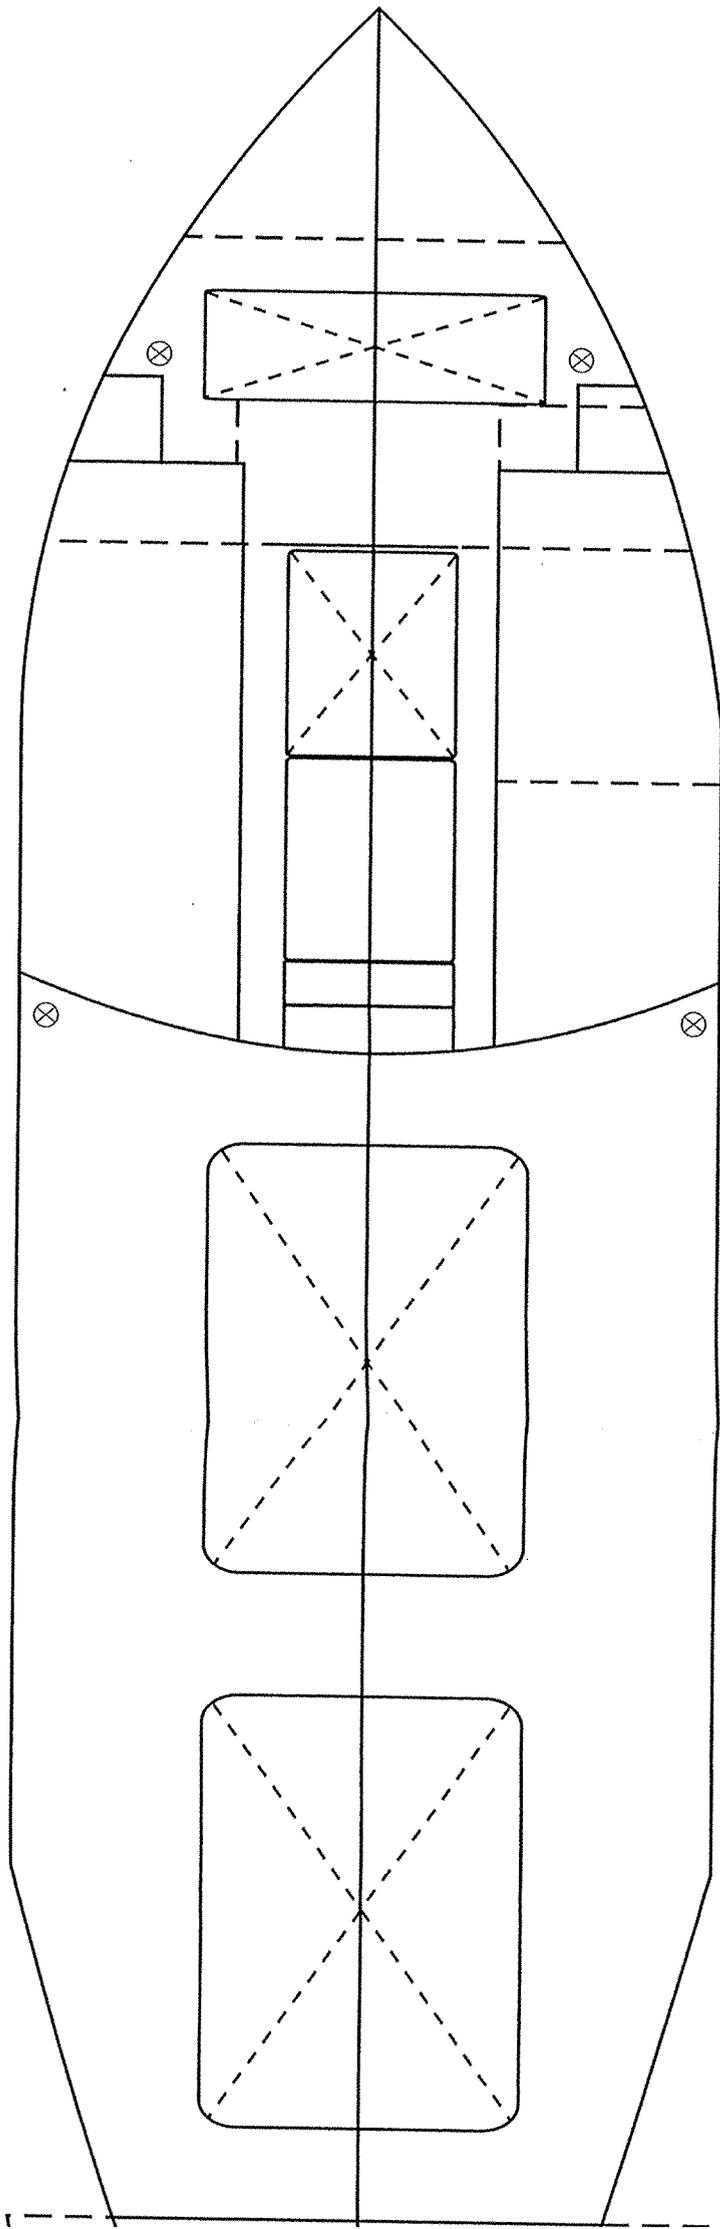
Plan and Profile. (sheet 1 of 4).
